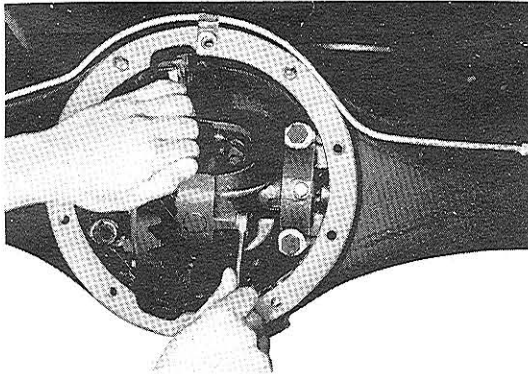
Removing Differential Pinion Shaft Pin V5091
